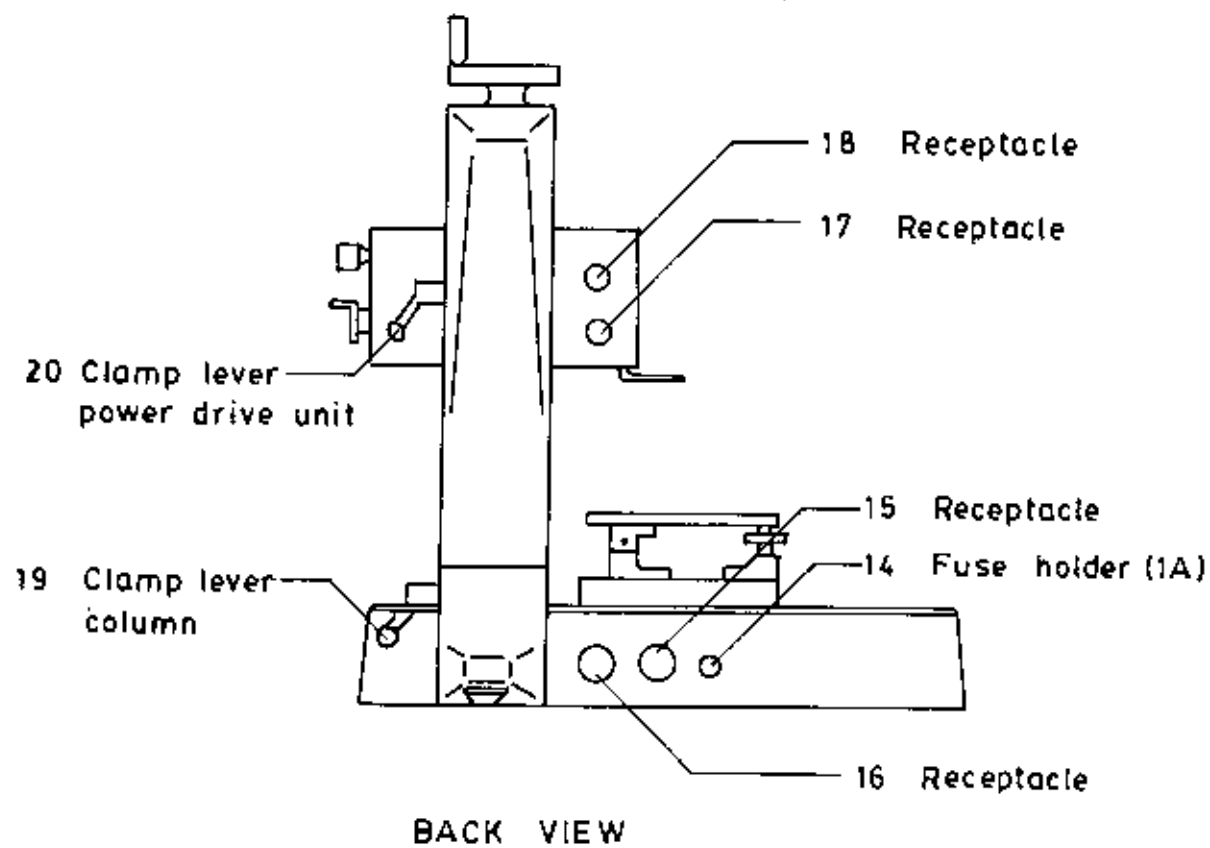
Surface roughness measuring equipment (surf. test AB-5 machine)
